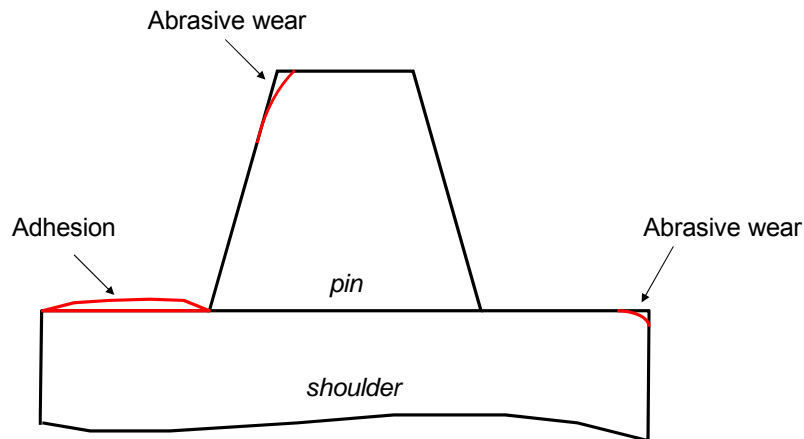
Observed wear mechanism during friction stir welding of steel
